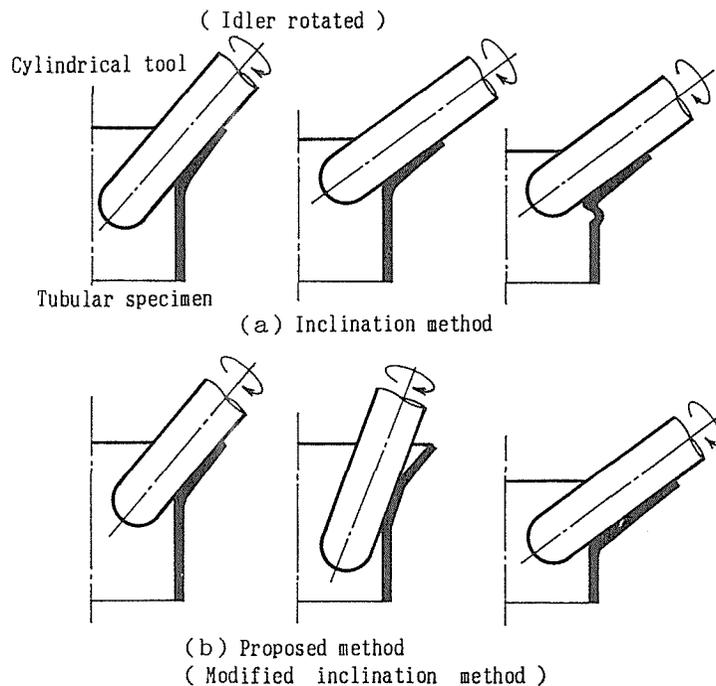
Proposed method for the preventing of the buckling at tool inlet.
